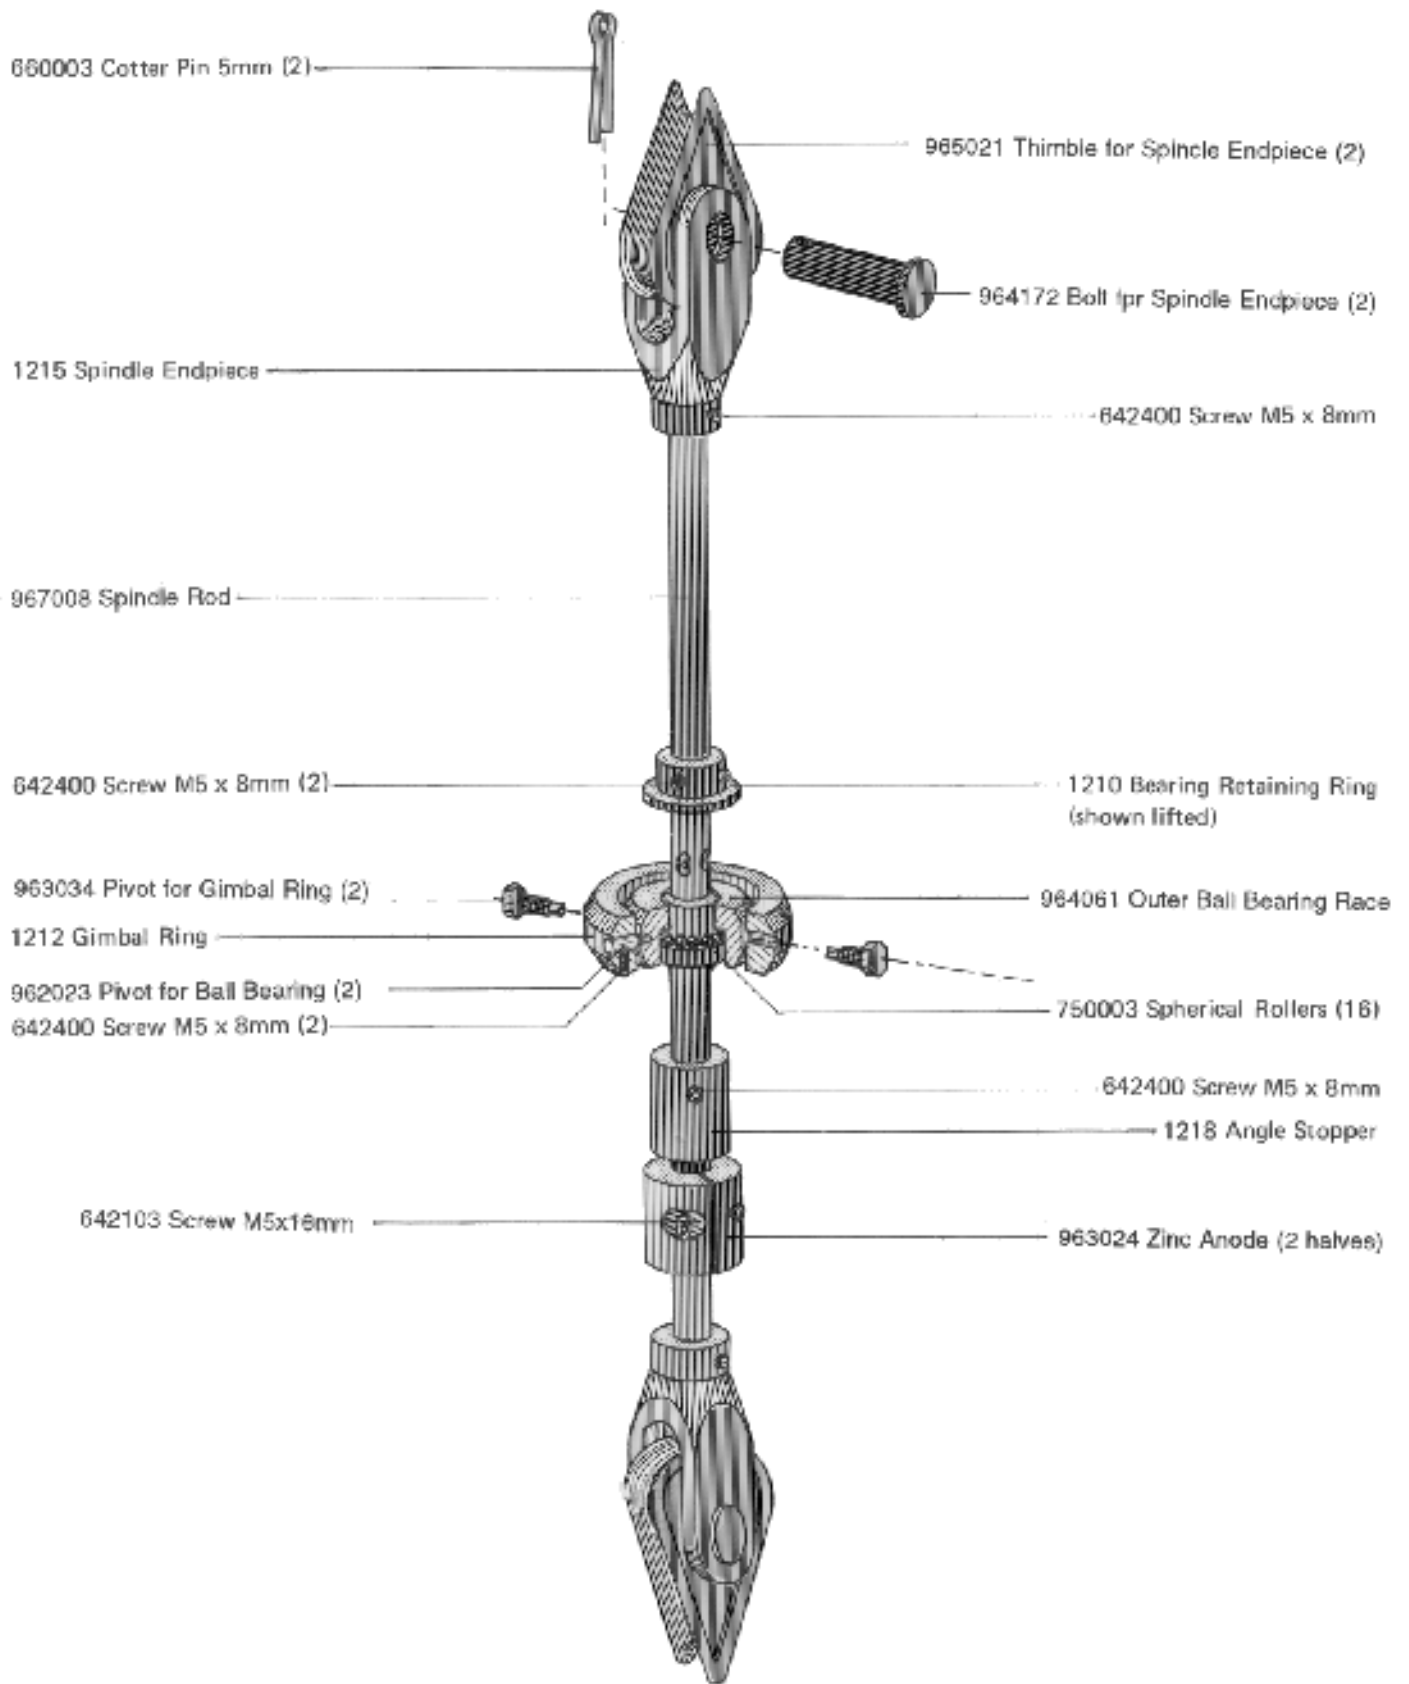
Spindle Assembly 3115 (V-4289N)
